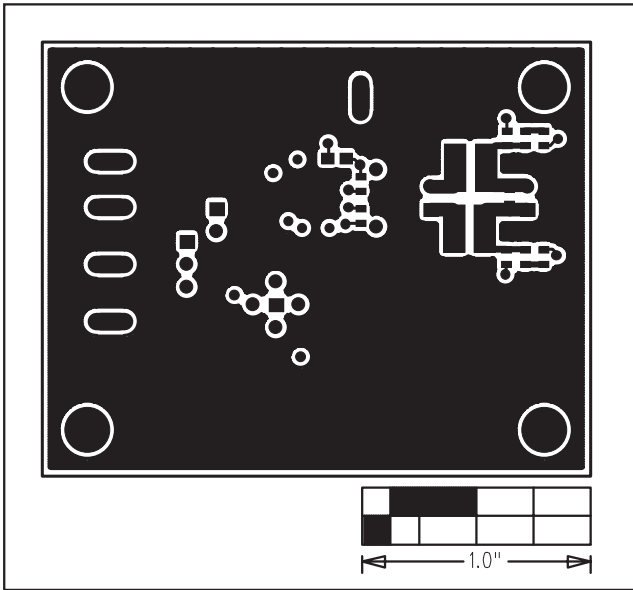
MAX9700B EV Kit PC Board Layout—Solder Side
